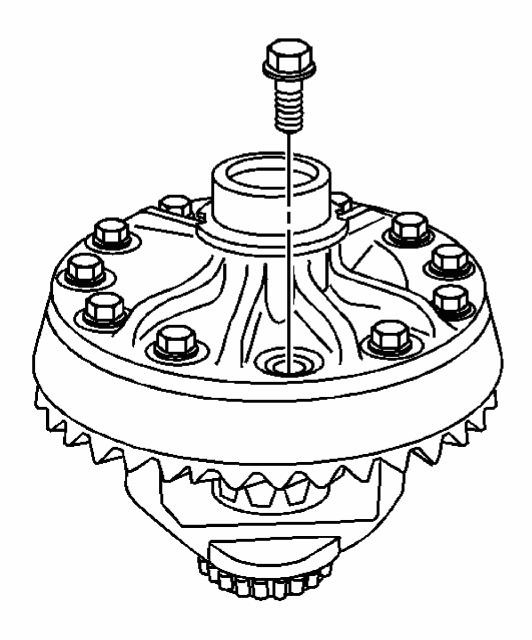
Identifying Ring Gear Bolts Courtesy of GENERAL MOTORS CORP.
